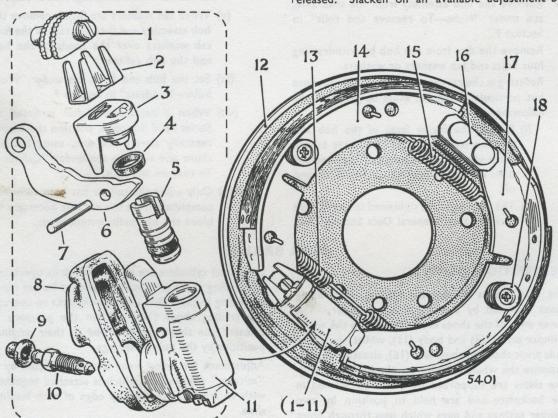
Exploded view of rear brake—right-hand side illustrated 7. Pivot Pin. 13. Pu
